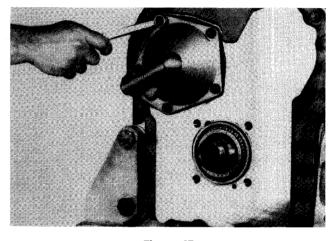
Remove 1st speed clutch (low) rear bearing cap bolts and washers.
